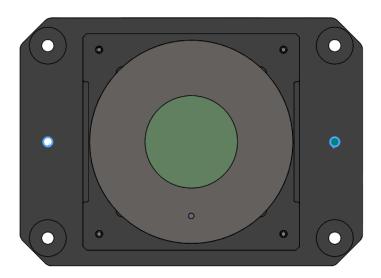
Pin holes for location of the Tesseract (highlighted in blue)
